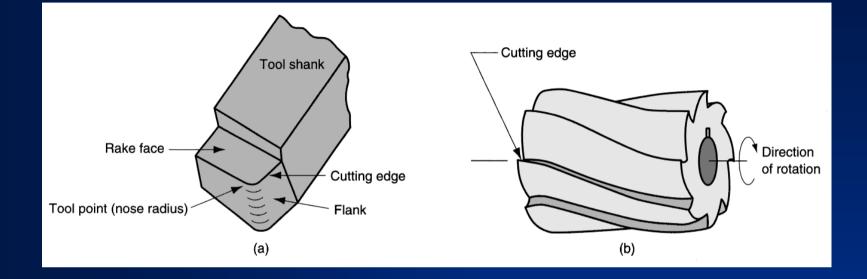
(a) A single-point tool showing rake face, flank, and tool point; and (b) a helical milling cutter, representative of tools with multiple cutting edges
